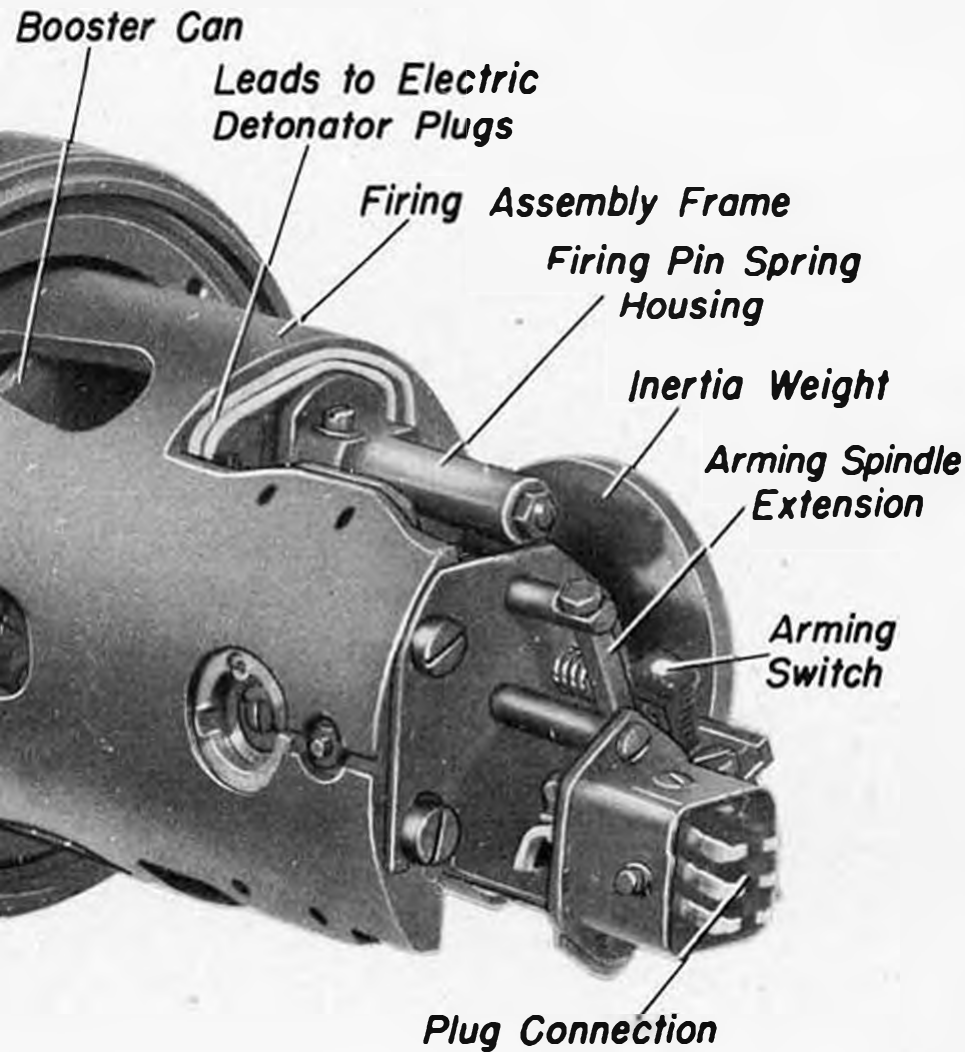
B - P1428(41) EXPLODER, CANISTER REMOVED
